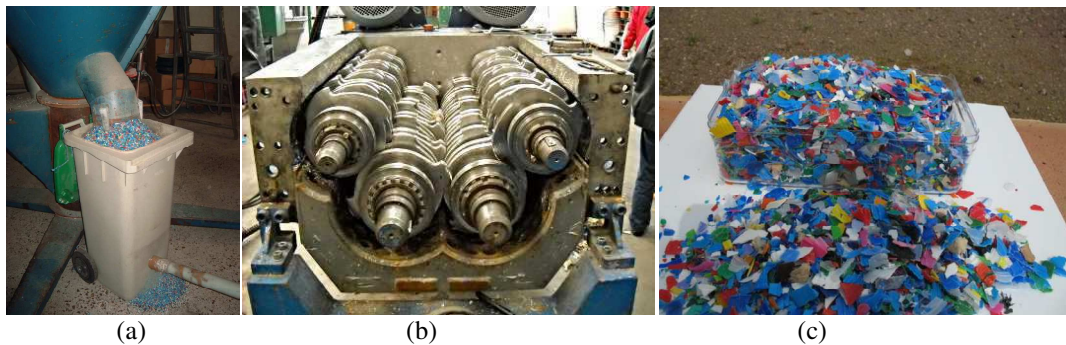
(a) milling step; (b) detail of the milling; (c) flake caps form after milling process (REZENDE JÚNIOR)
